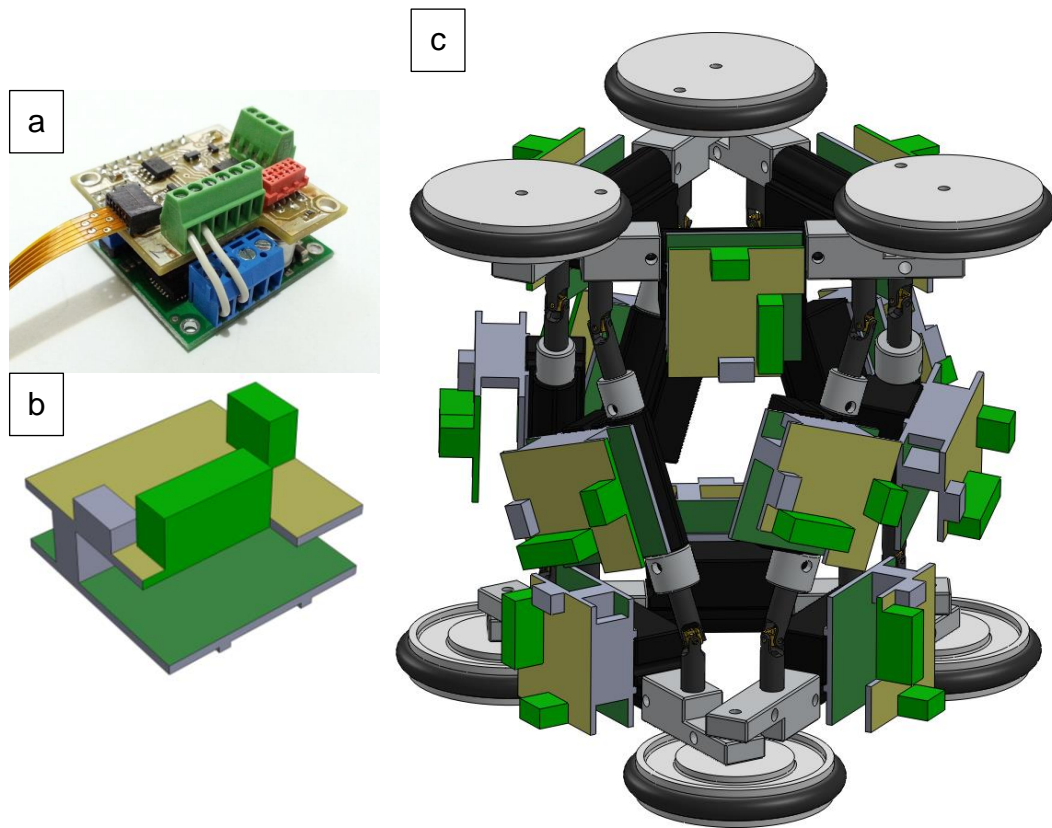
3D CAD model of the robot with motor controllers mounted.
